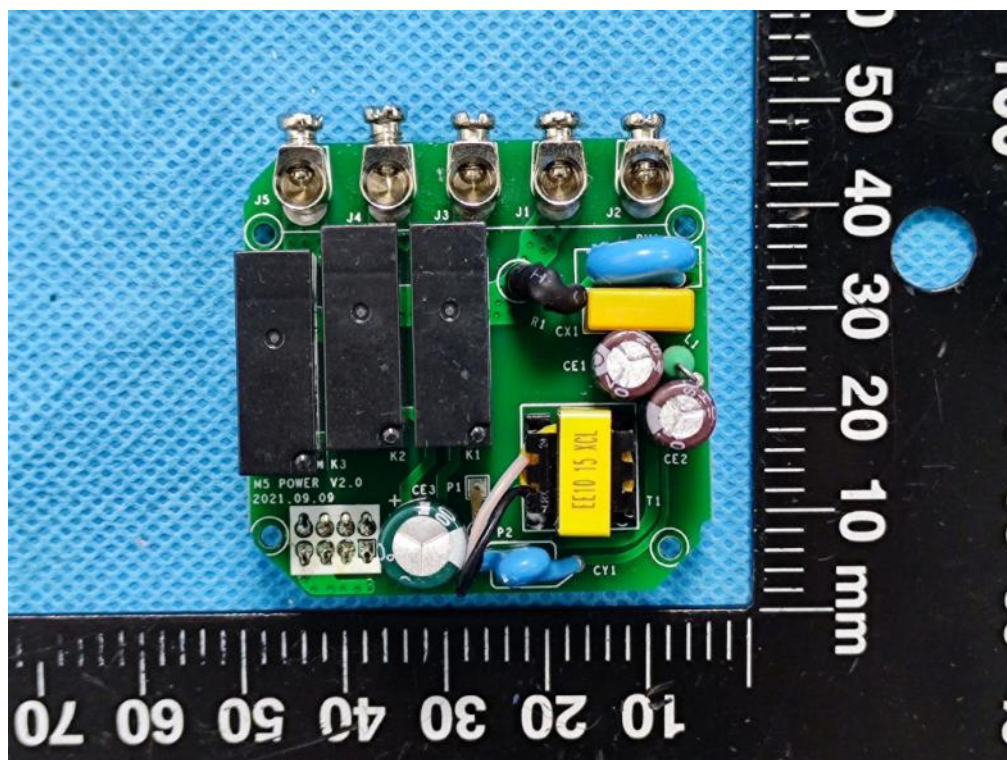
PCB top view of power bard(Model: M5-3C-80)
